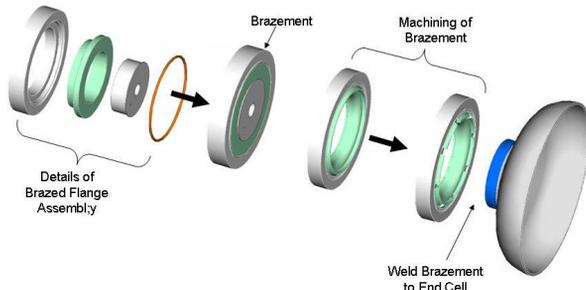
Sequence of Steps that make up the New End Cap Brazed Assembly.
